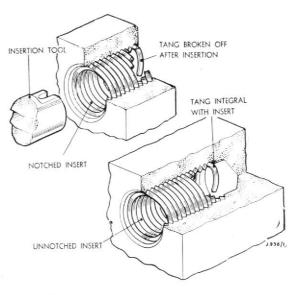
Example of notched and un-notched inserts fitted to "through" and "blind" holes by means of insertion tool shown.
